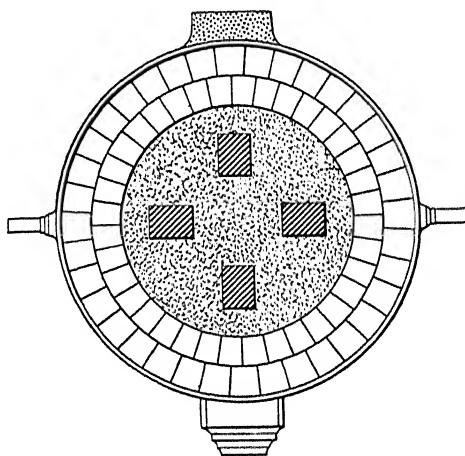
SECTIONAL PLAN OF GIROD'S FURNACE.
